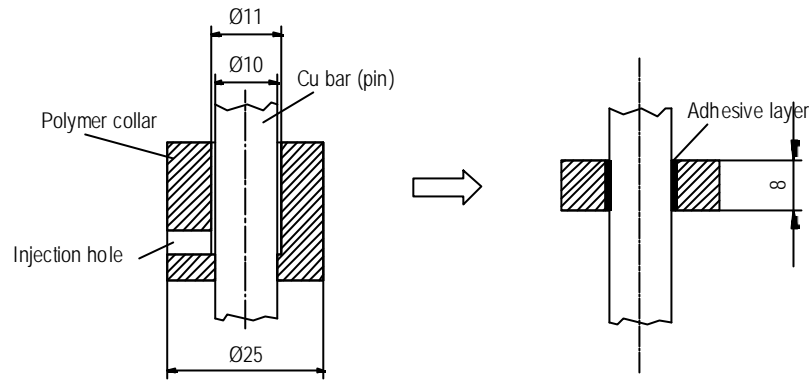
Specimens for pin and collar tests, adhesive injection configuration (left) and final shape (right)
